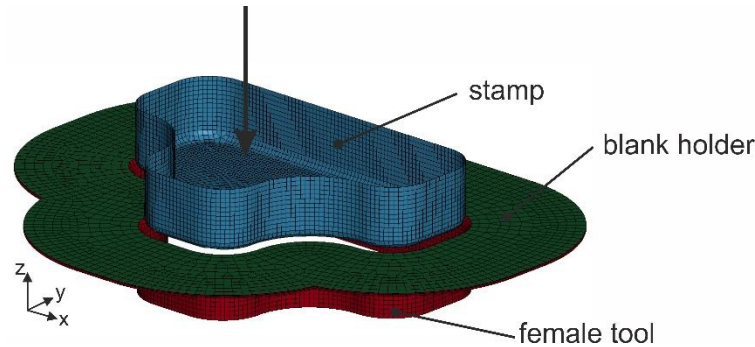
Model of the forming tool with T-shape geometry (arrow showing movement of the stamp)
